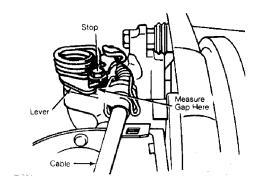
Adjusting Rear Disc Parking Brake Courtesy of Volkswagen United States, Inc.
